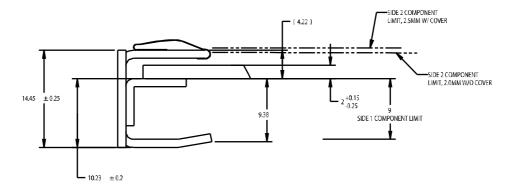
Unsealed Module Dimensions, Top Detail
